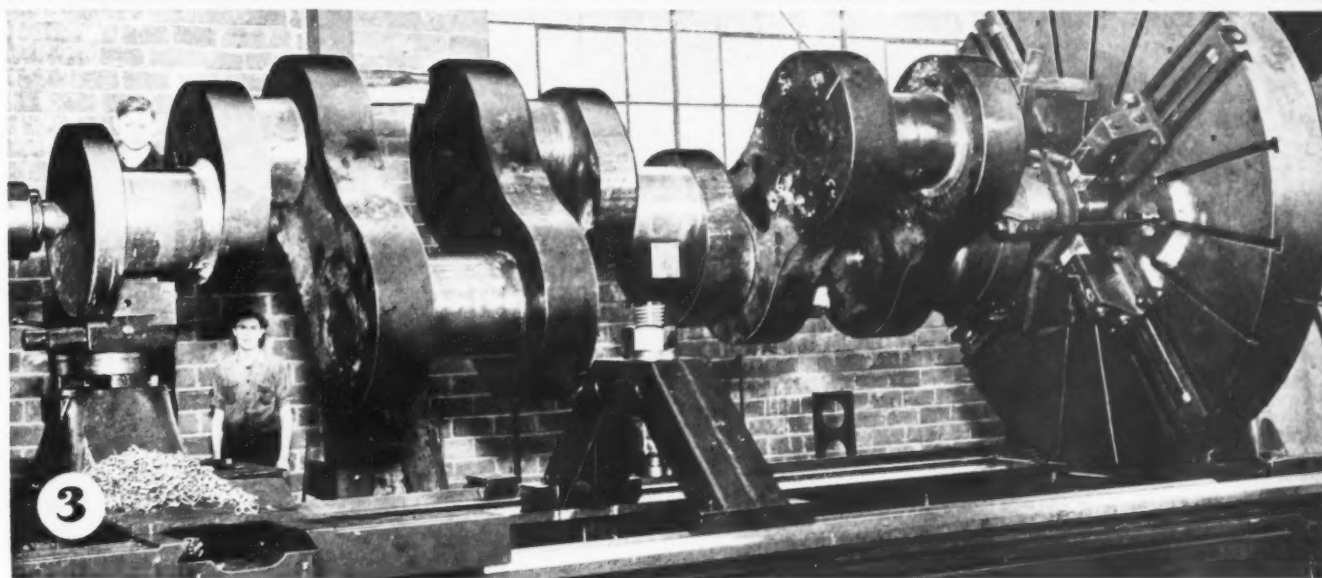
Huge Crankshafts for Sun-Doxford Diesel Engines, which are Built up from Individual Journal, Crankpin, and Crank-arm Forgings, are Finish-turned on the Journals in This Large Lathe
